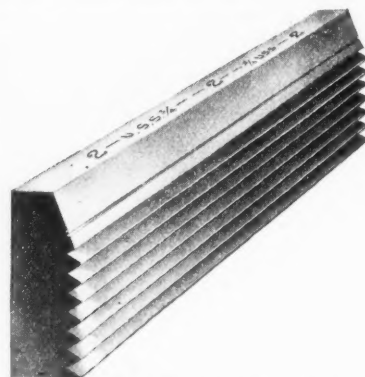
Type of Chaser used in Landis Bolt Cutter.
